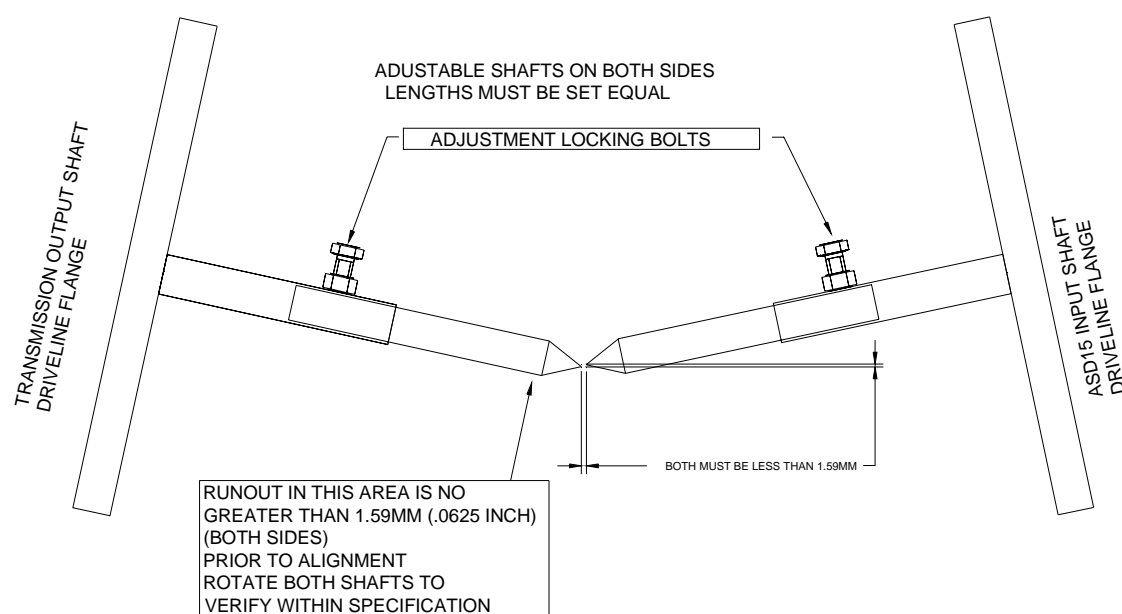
Remote or Island Mounted Alignment Tool, Shafts not Parallel
